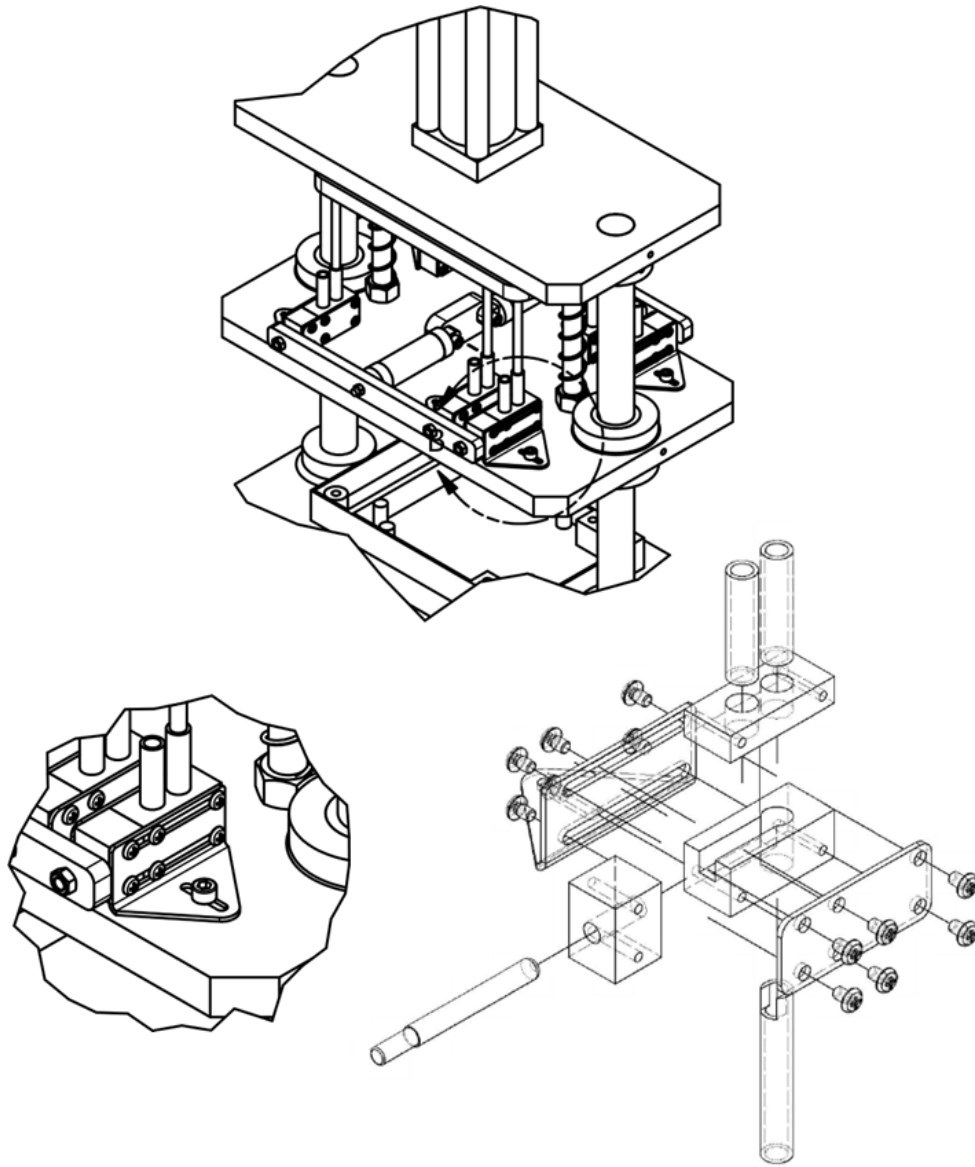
Technical Drawing of the Pneumatic Auto-Feed and Press Mechanism.
